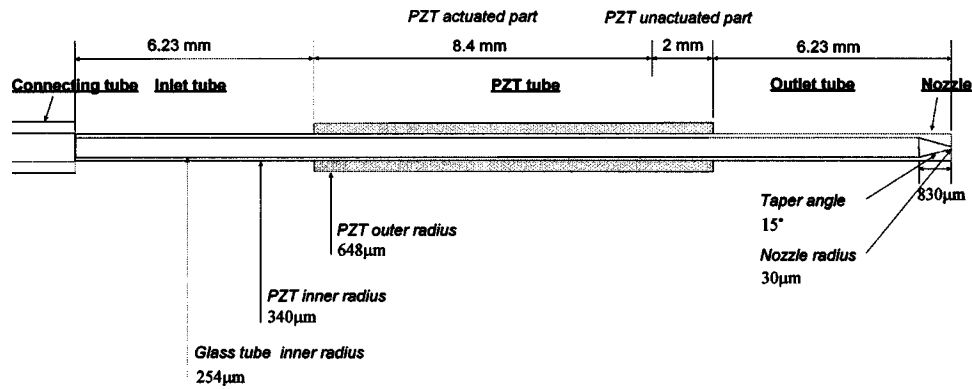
Print head dimensions (Provided by MicroFab Inc.)
